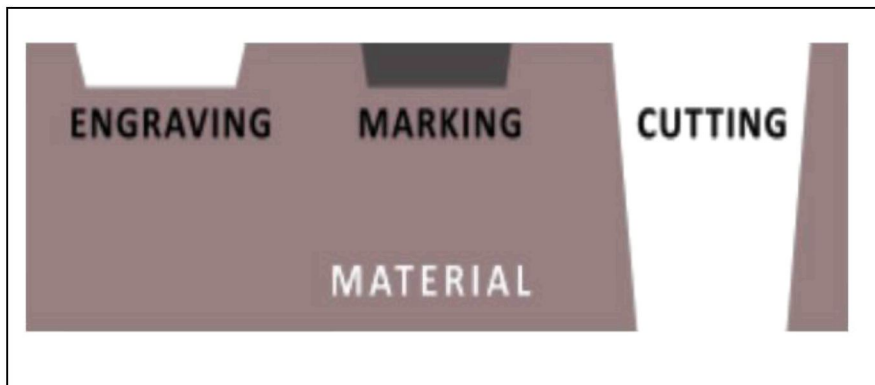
Illustration of Engraving, Marking, and Cutting Processes on Material (Narica et al., 2019)
